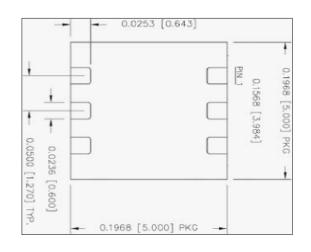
Recommended PCB layout to accommodate CCBC012 package
